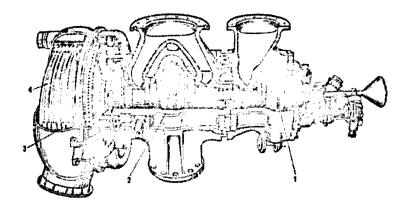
Turbopump Assembly of the RD-107 and RD-108 Engines: 1 -- fuel pump; 2 -- oxidizer pump; 3 -- turbine; 4 -heat exchanger
